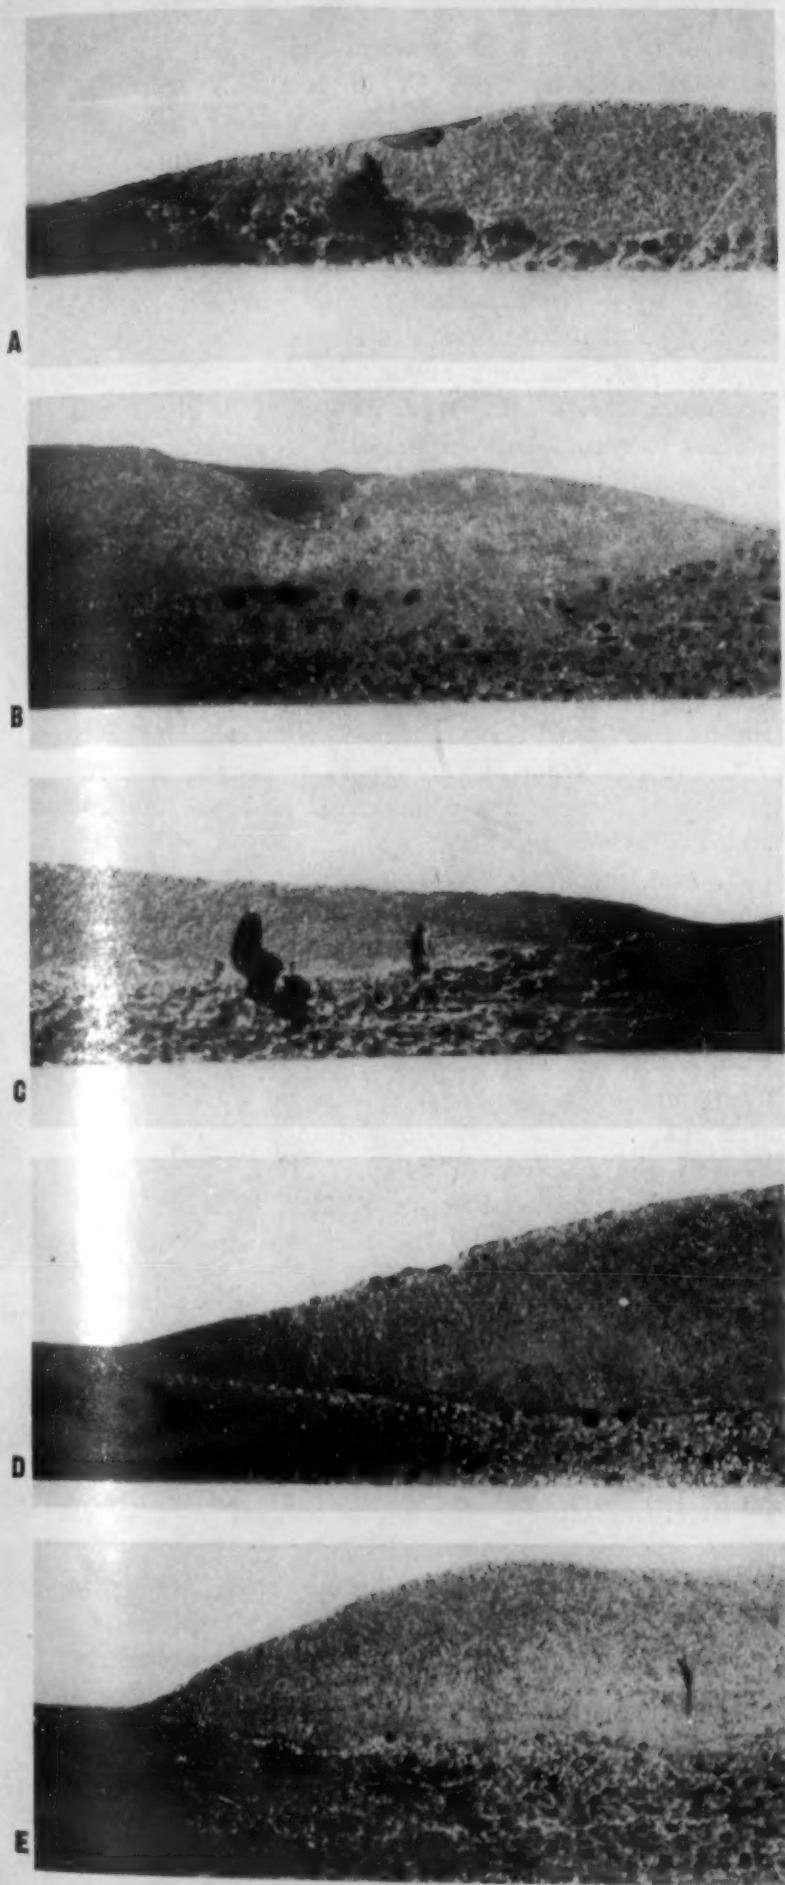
Cross section of X4130 steel arc welded. Macrographs A, B and C, without crater eliminator. Macrographs D and E, with crater eliminator.
